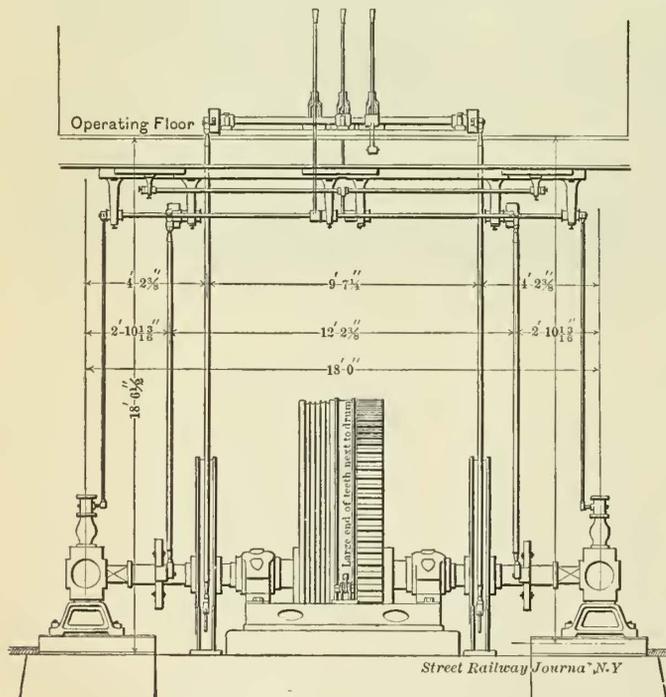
END ELEVATION, SHOWING CONTROLLING DEVICES—OTIS ELEVATING RAILWAY.
